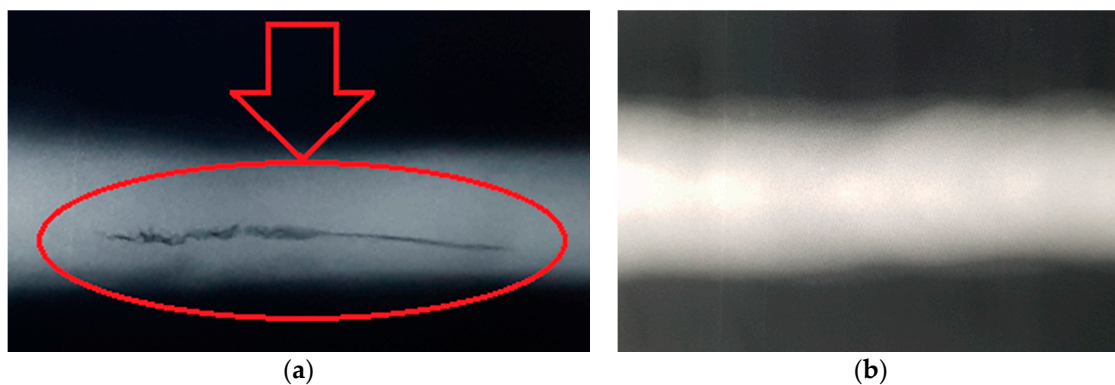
Weld after welding without (a) and with (b) micro-jet cooling in X-ray inspection.
